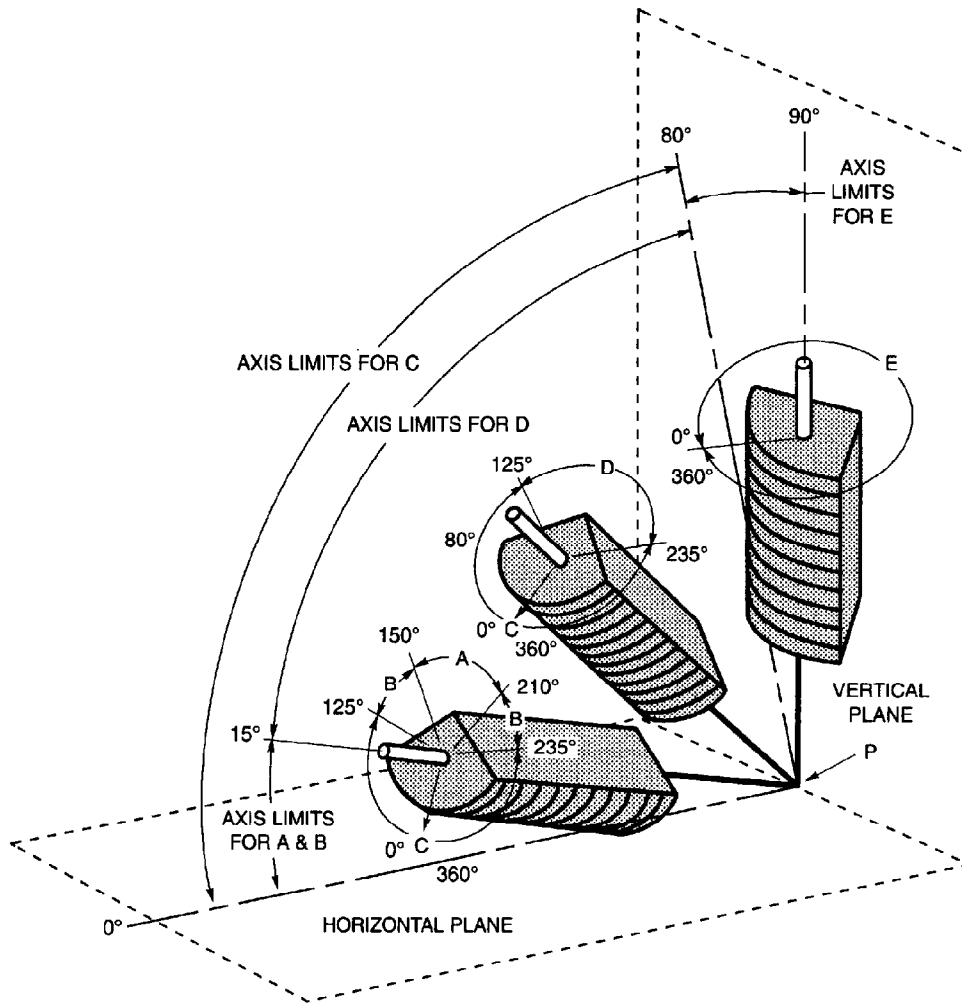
Positions of Fillet Welds (see 4.2.4)
